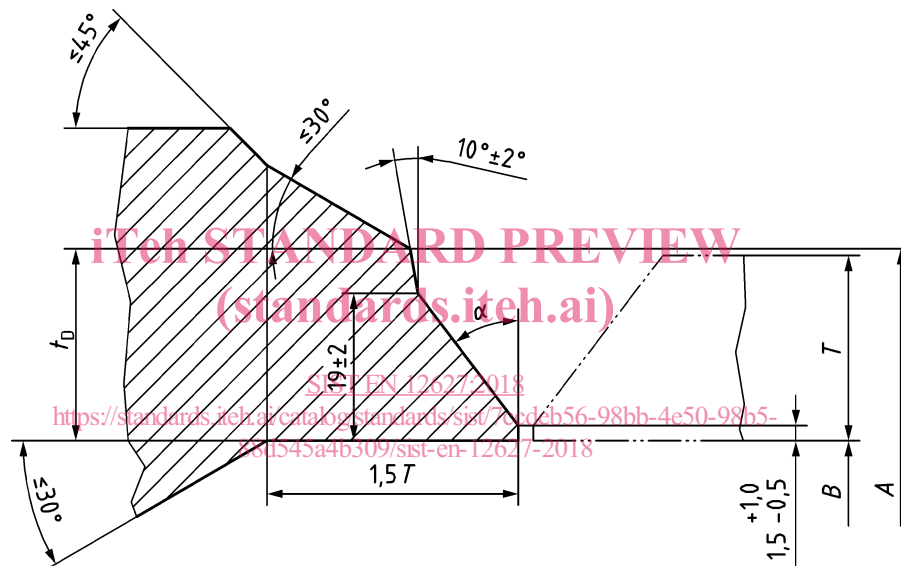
Single-V butt weld end connection with V root to pipe of wall thickness $T > 22 \text{ mm}$
